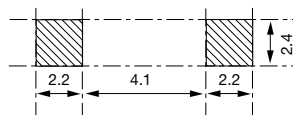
CSM-8A – Recommended Solder Pad Layout Top view
